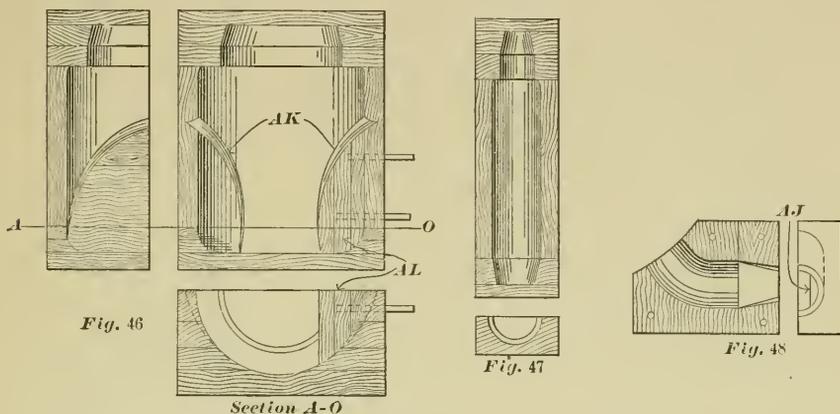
Core Box for Exhaust Chamber    Fig. 47. Core Box for Holding Down Bolt Lugs
